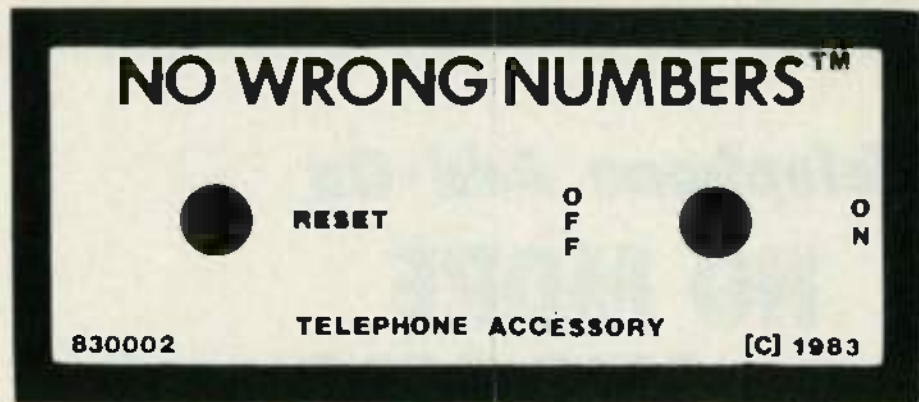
FOR SIMPLICITY, ■ PC board is used for the front panel. The foil pattern for that board is shown here.
